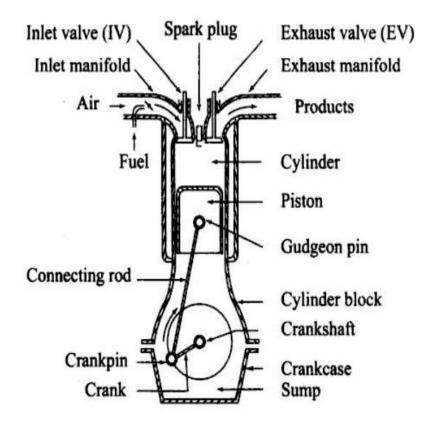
Cross-section of a Spark-Ignition Engine
